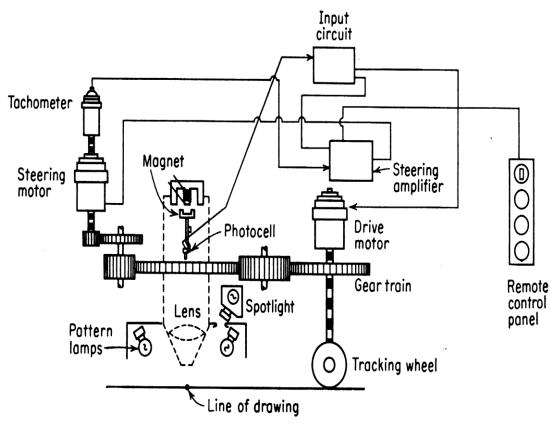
A schematic drawing of a gas cutting machine tracing head, showing the control equipment.
